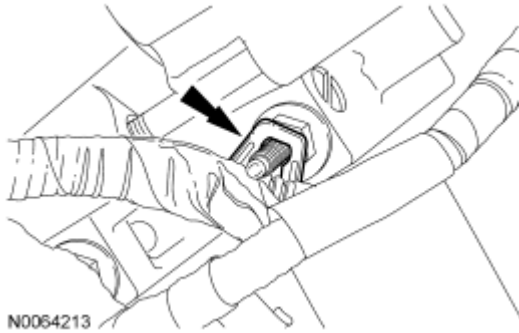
Locating Wire Harness Retainer From A/C Compressor Stud Bolt
